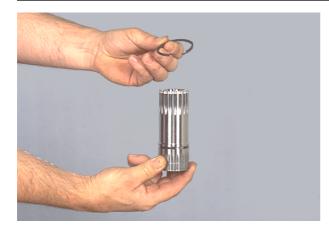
Install oil sealing ring on expander ring. NOTE: Expander spring gap to be 180 degrees from sealing ring hook joint.
